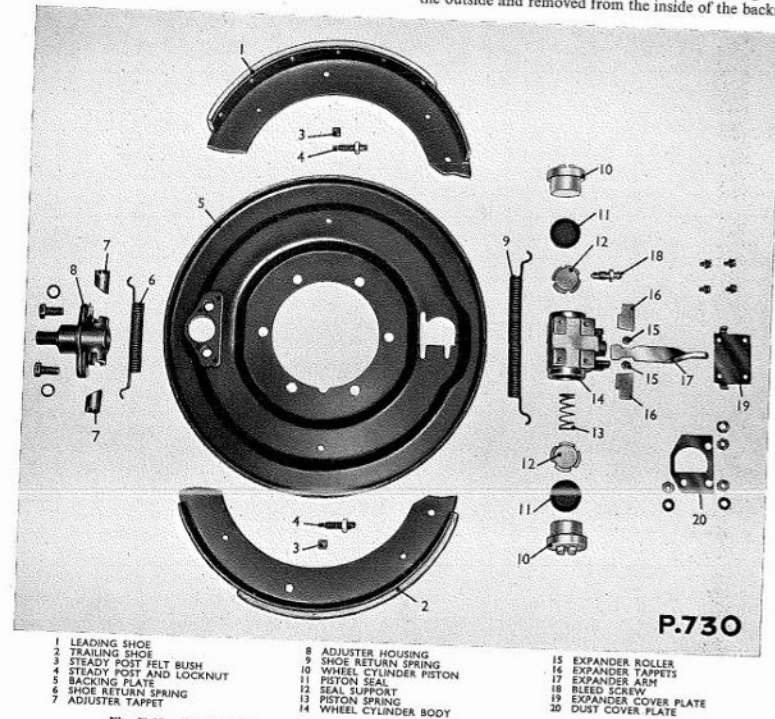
Details of the rear brake assembly as fitted to the KAH.30 and KAD.30 models
